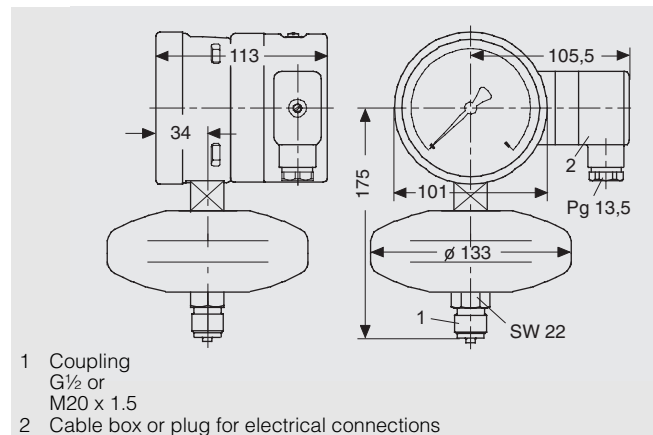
/159 Pressure gauge with remote transmitter, dimensions
